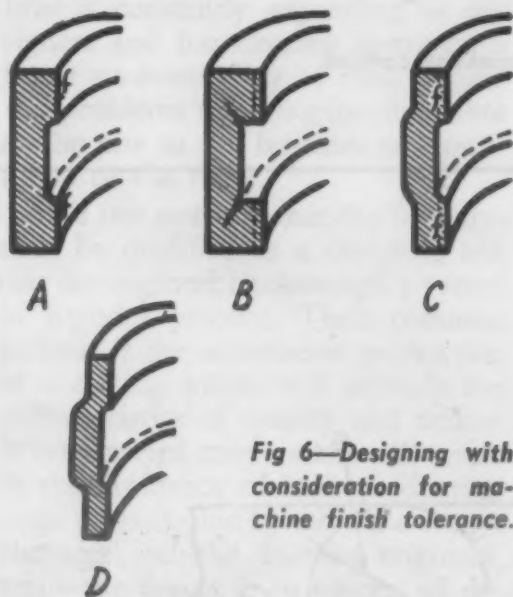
Designing with consideration for machine finish tolerance.
